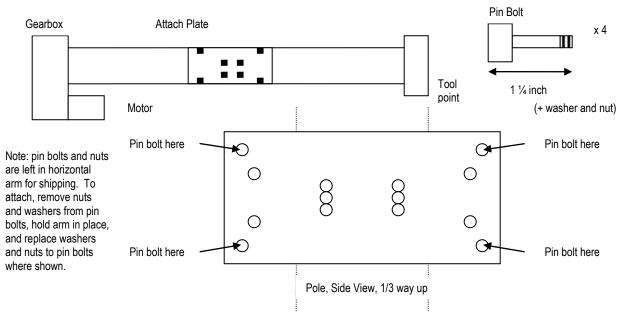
Horizontal Axis Alignment Pin-bolt Locations
